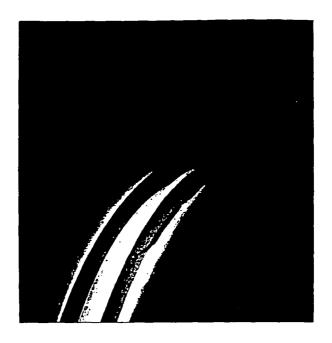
Cracks in aluminium compressor piston as detected using dye-penetrant testing. This piston was scrapped after close inspection of the cracking highlighted by the dye-penetrant test.
